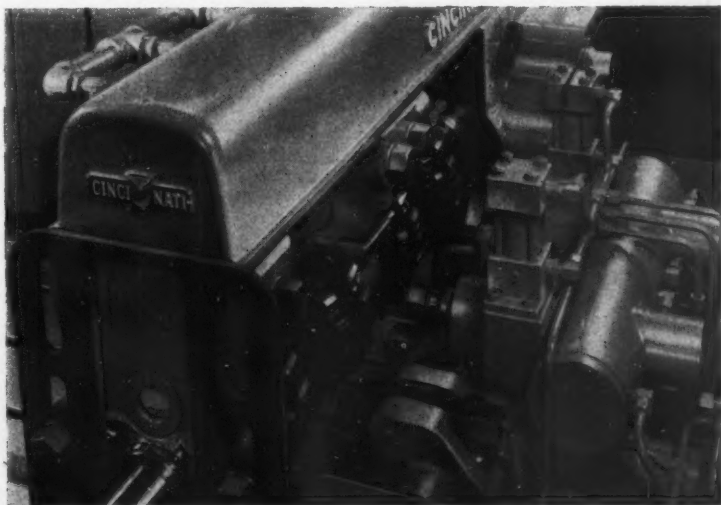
Multi-station fixtures are provided at each end of the table on this Cincinnati machine for straddle milling flats on motor-car stub axles
